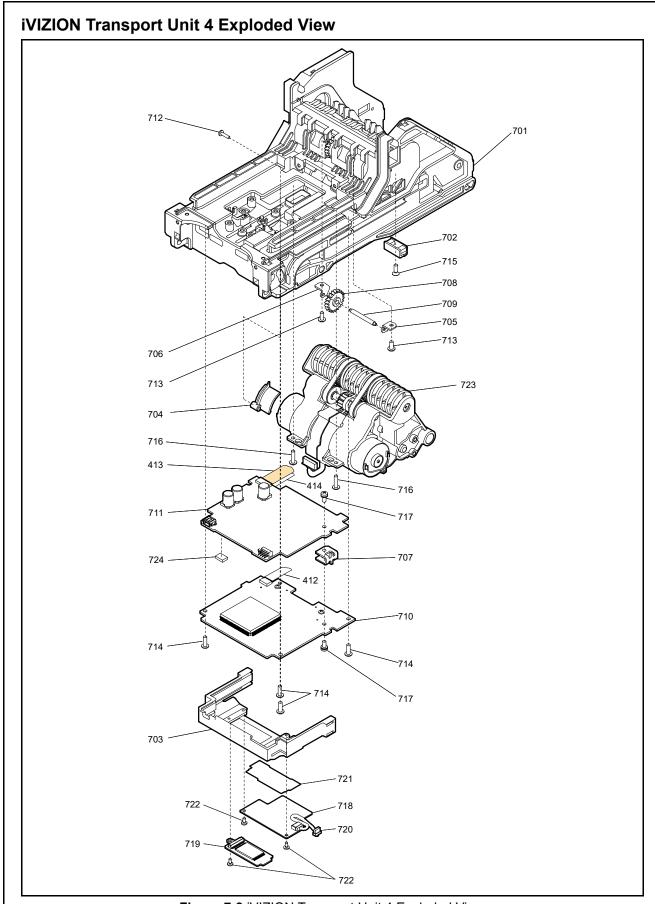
iVIZION Transport Unit 4 Exploded View
